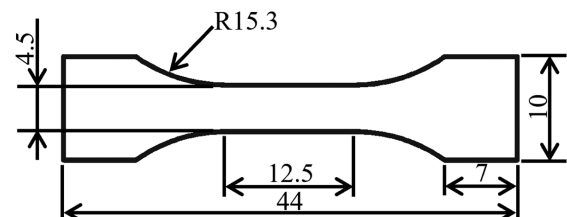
CFRP specimen geometry for ultrasonic fatigue test (unit: mm).
